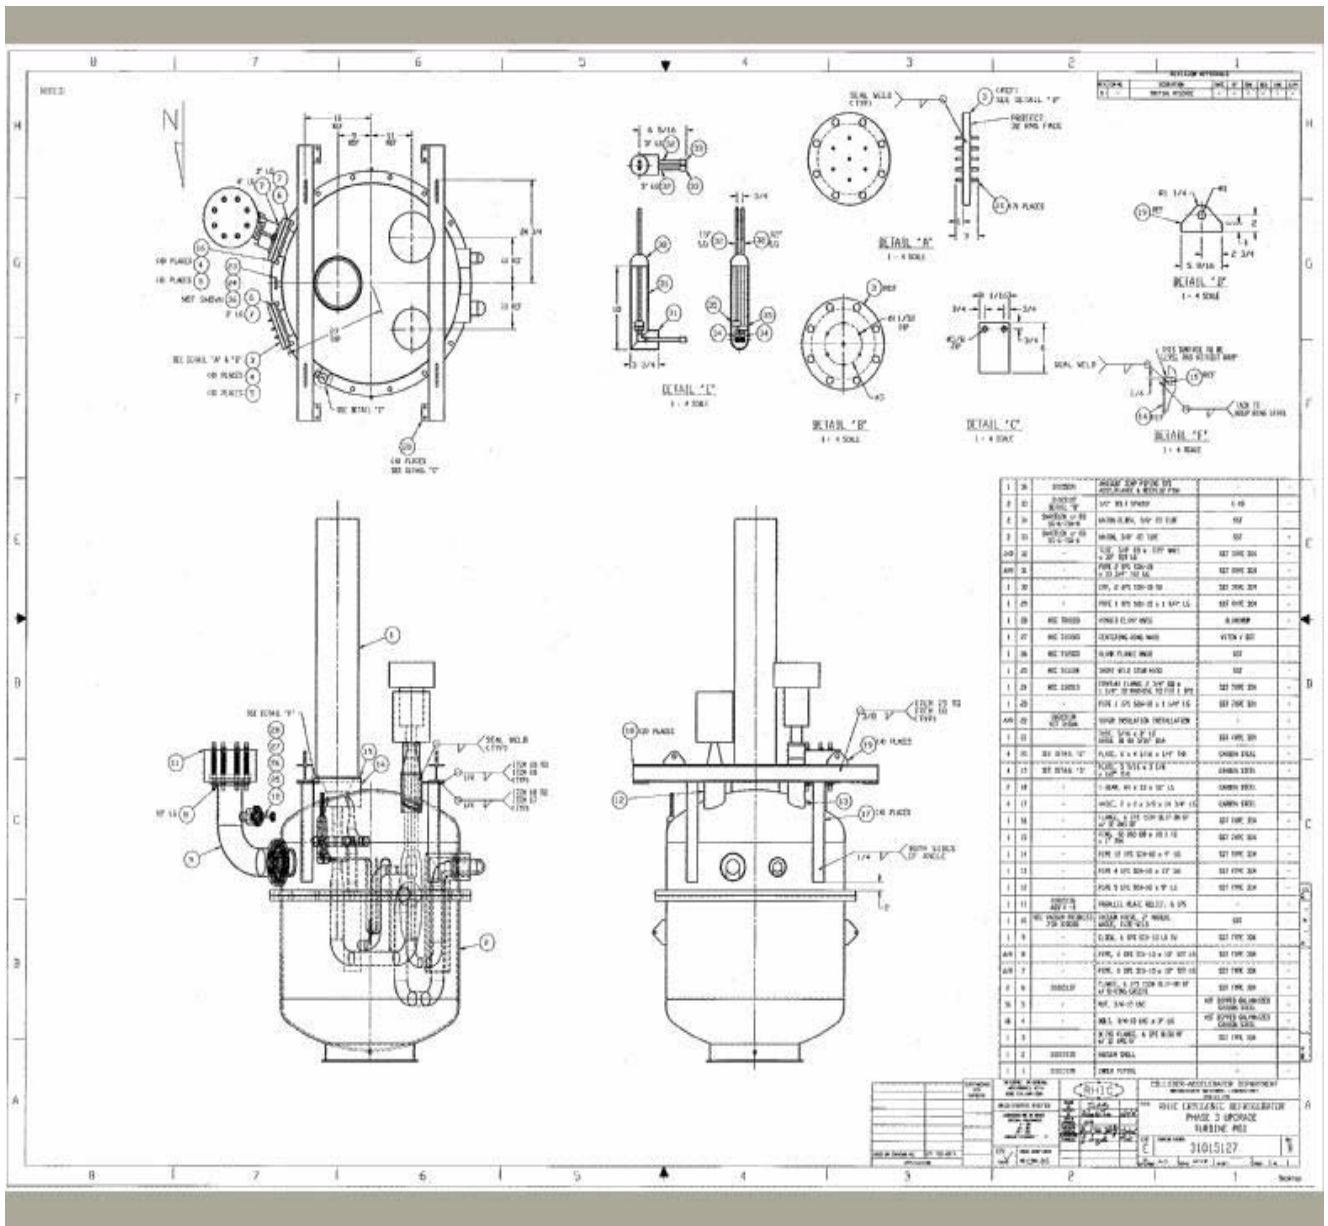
Figure D: Assembly drawing showing Turbine Pod 7, drawing No. 31015127.
